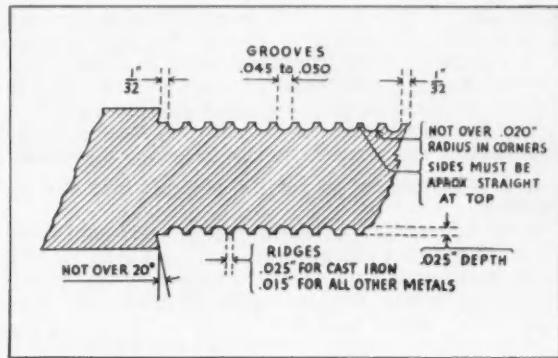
"Groove and knurl" method of anchoring sprayed metals is accomplished by mounting the shaft on a lathe. Then, after turning undersize, it is grooved as shown here.
